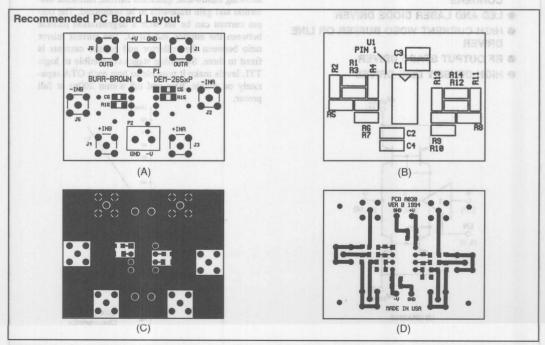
Board Silkscreen (Bottom). 13b. Board Silkscreen (Top). 13c. Board Layout (Solder Side). 13d. Board Layout (Layout Side).
